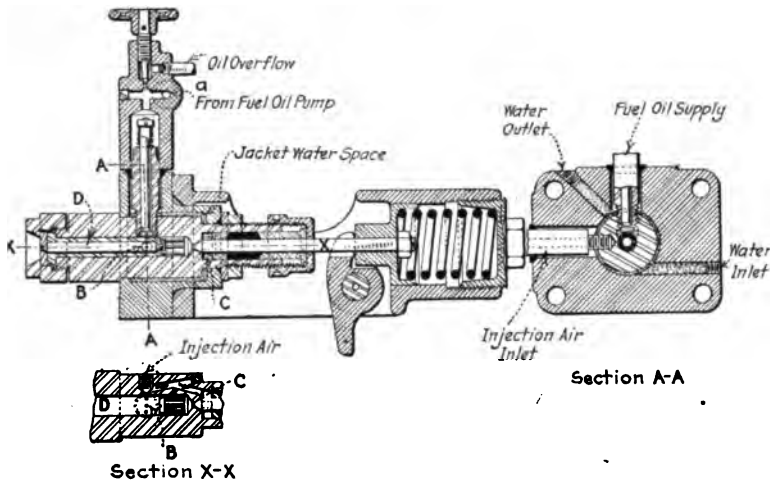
Standard Fuel Oil two-cycle Diesel fuel valve.
